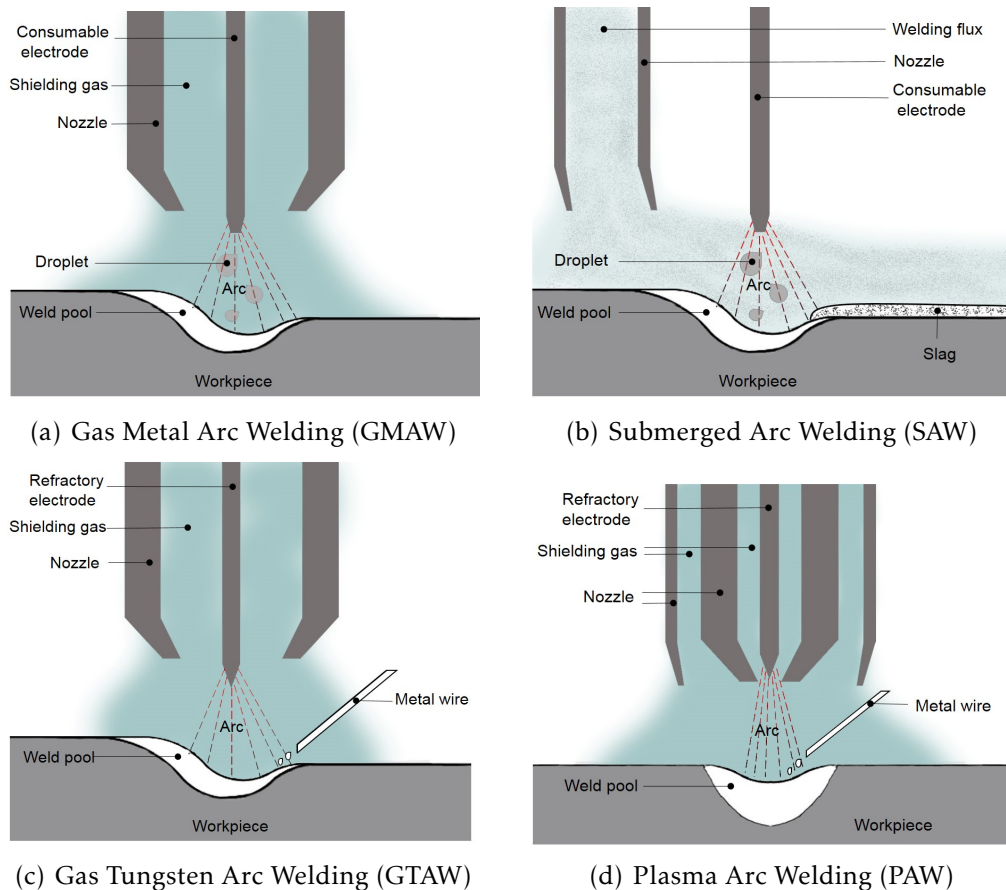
Schematic sketch of four different types of electric arc welding processes.
